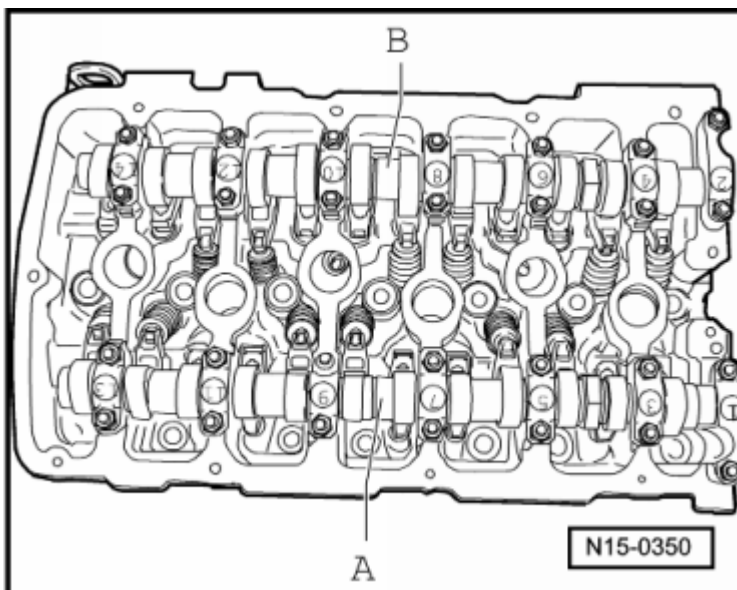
Identifying Intake Camshaft And Exhaust Camshaft
